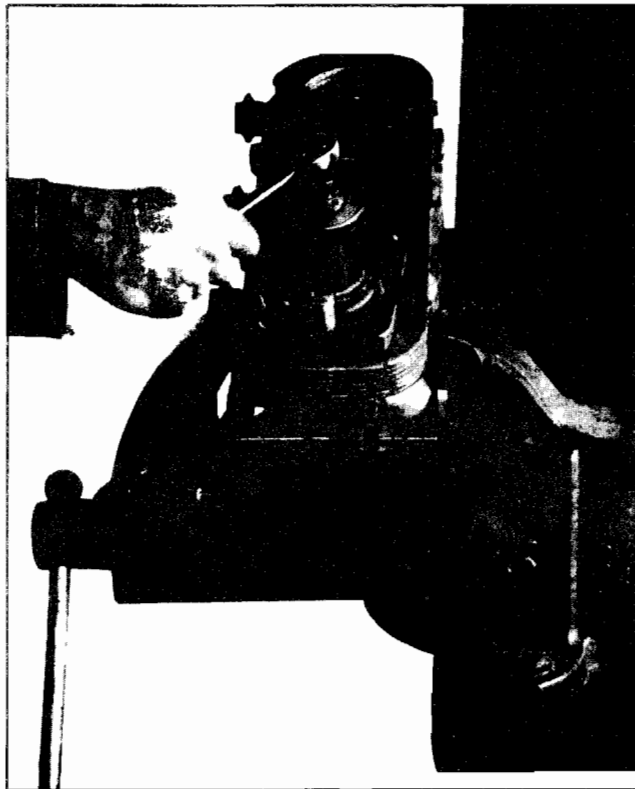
Corvair Cylinder Head Resurfacing Tool—J-22395
